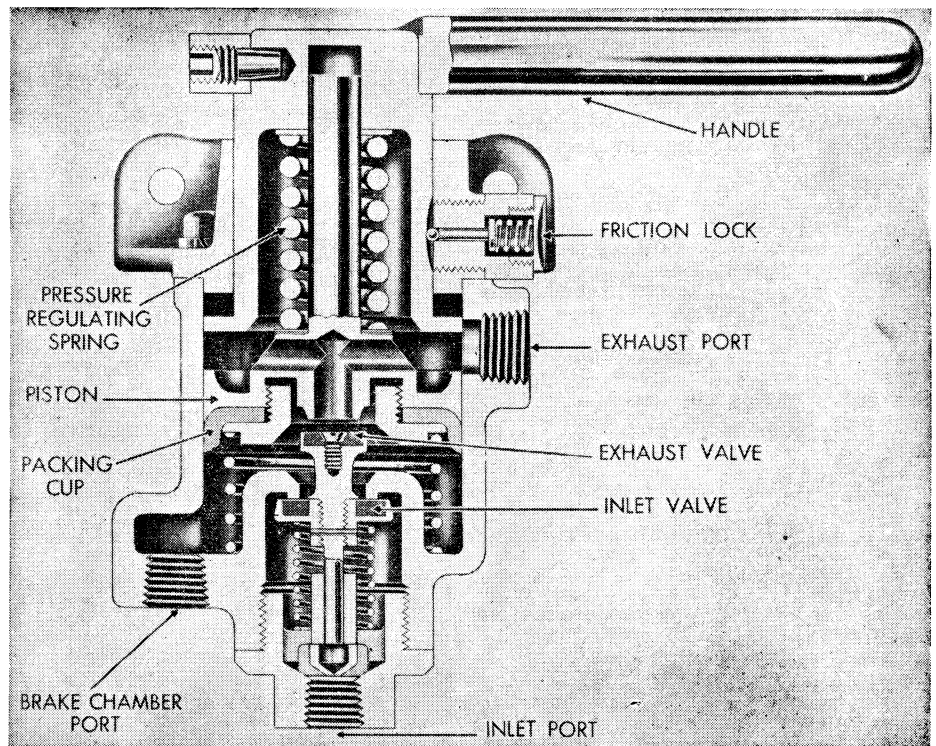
Sectional view of Type HP Hand-Operated Brake Valve
